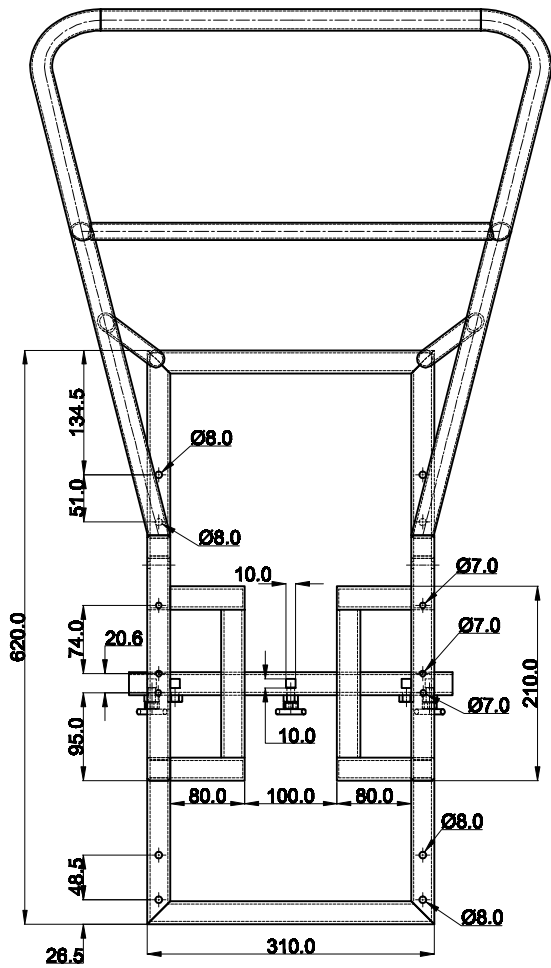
ORTHOGRAPHIC VIEW OF MAIN FRAME ASSEMBLY
